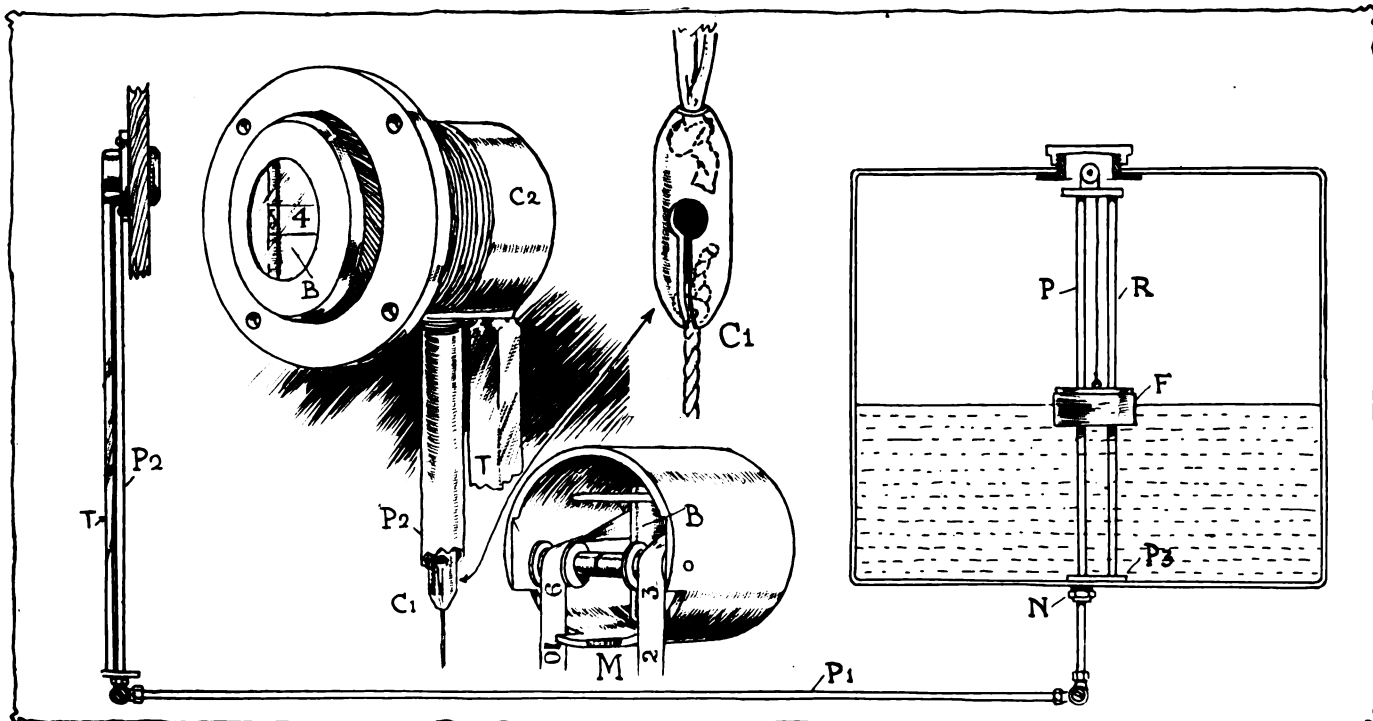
Arrangement of the Smith gasoline meter, showing connections between tank and dashboard indicator and principal parts
